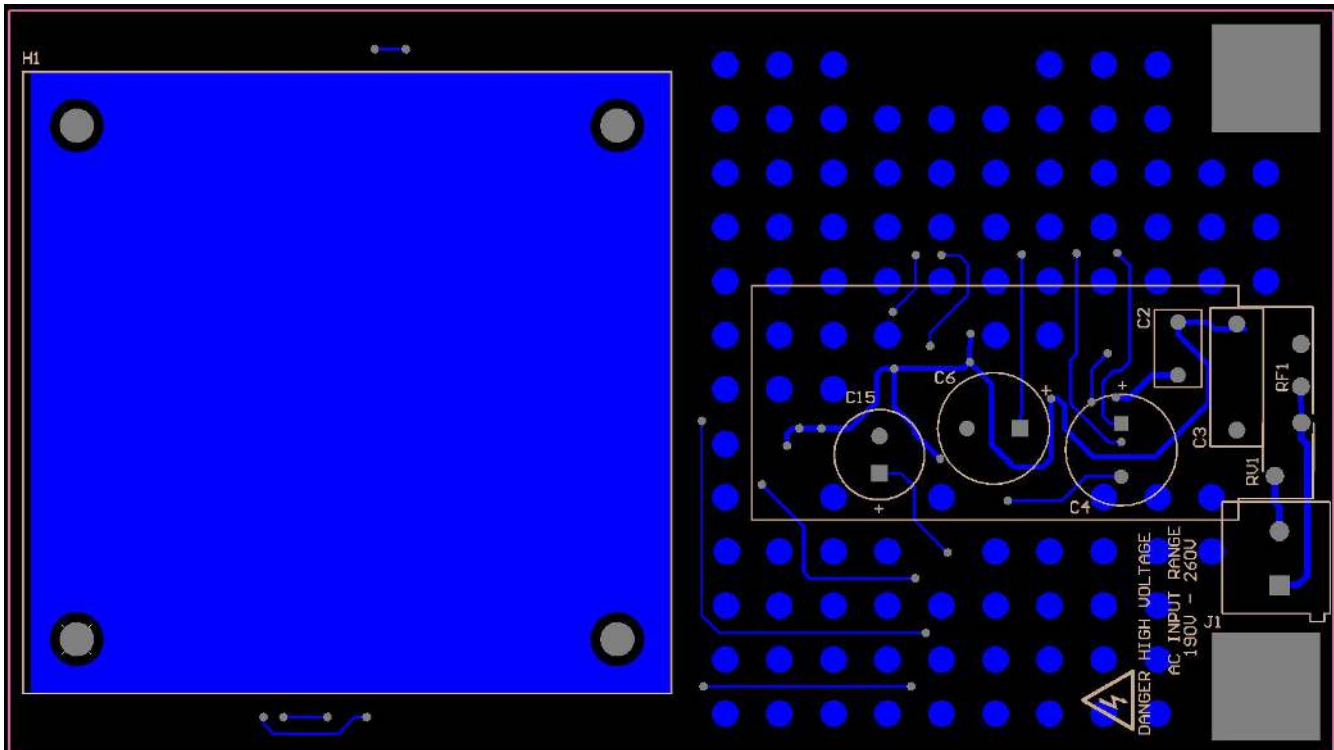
Bottom Layer and Bottom Overlay (Bottom View)
